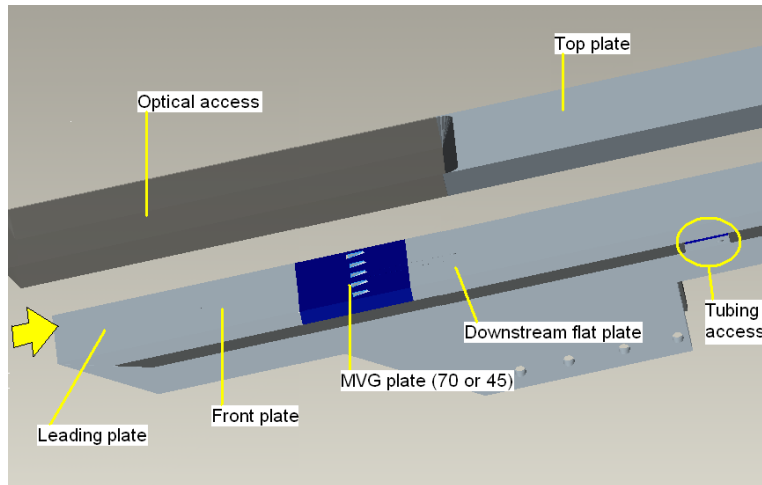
CAD rendition of "MVG+Flat" assembly.
